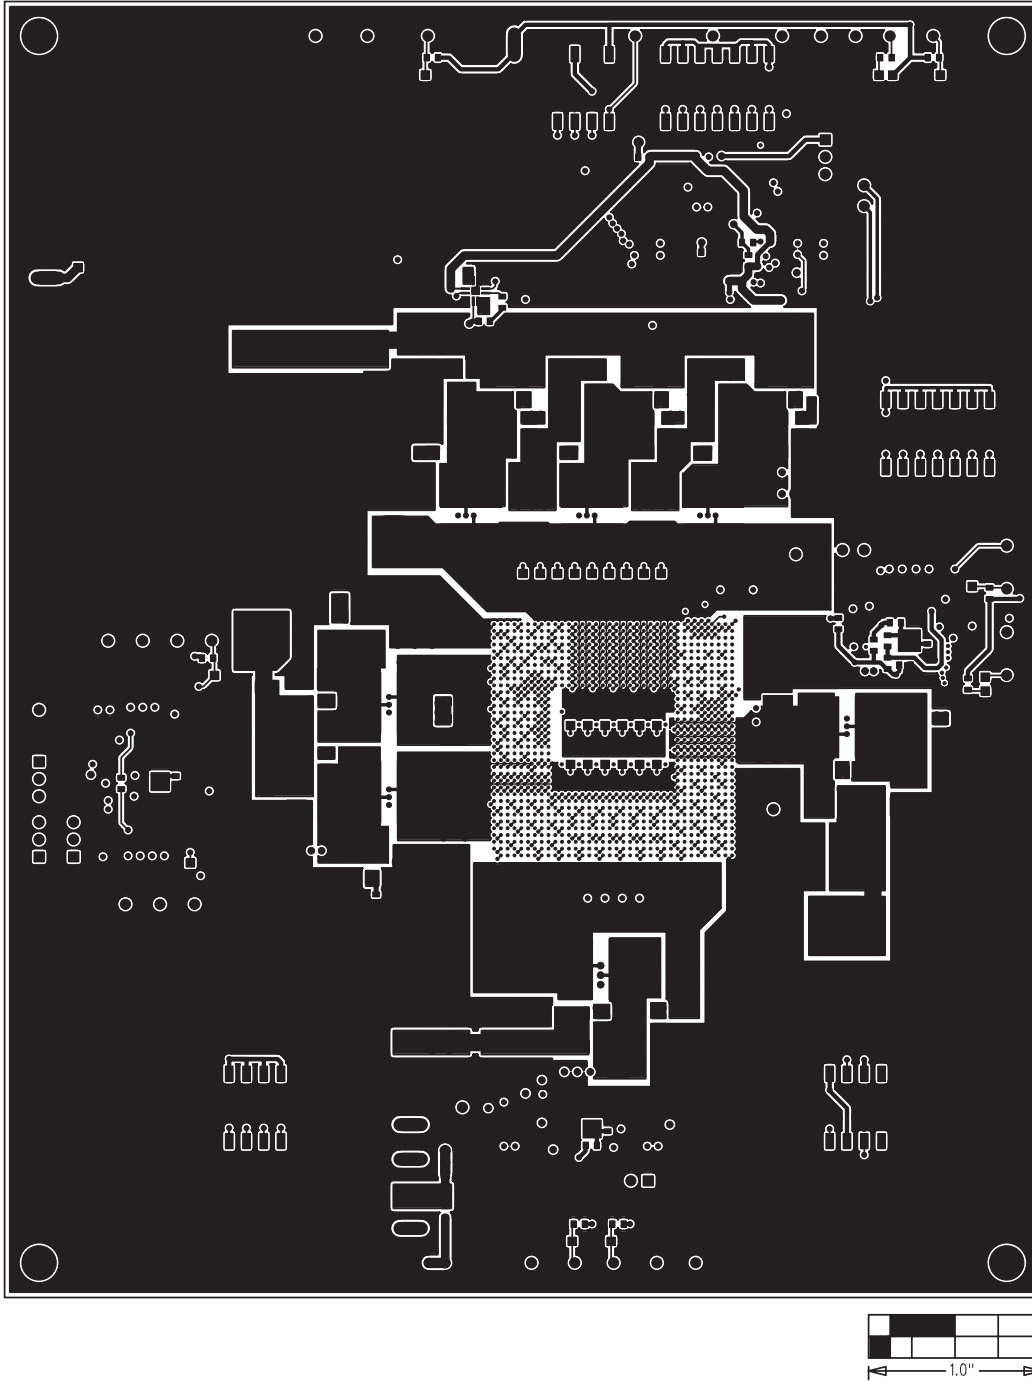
MAX17030 EV Kit PCB Layout—Component Side
